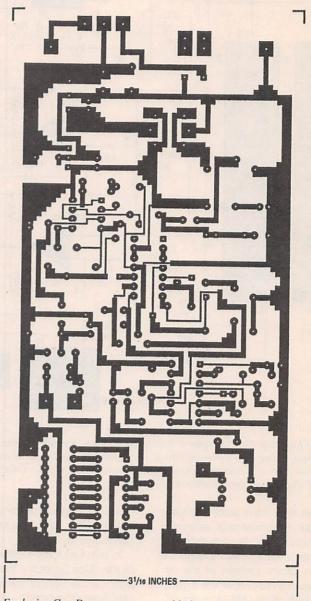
The Explosive Gas Detector was assembled on a printed-circuit board measuring about 31/16 by 59/16 inches. A template for that printed-circuit pattern is shown here.
